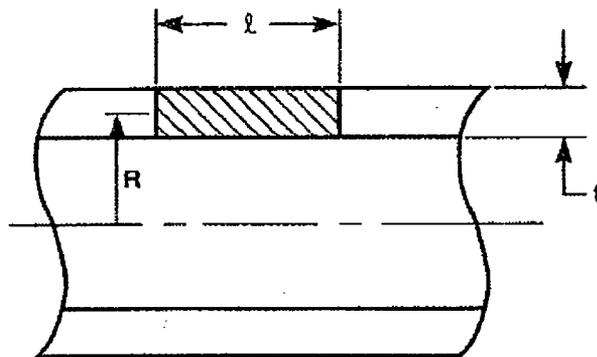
Assumed Axial Flaw Geometry in a Pipe
